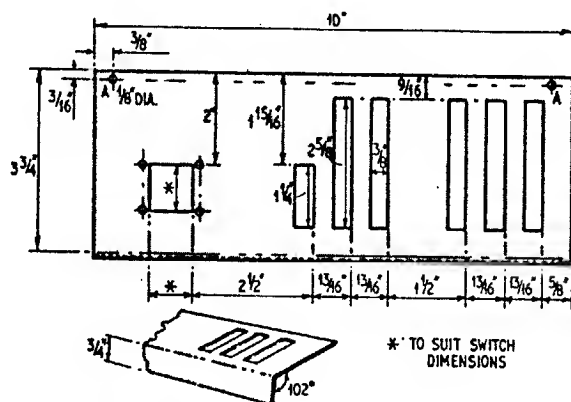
The cutting and drilling details of the keyboard panel which is made from an extra front panel. All flanges should be sawn off except one long edge which is bent as shown in the smaller diagram
